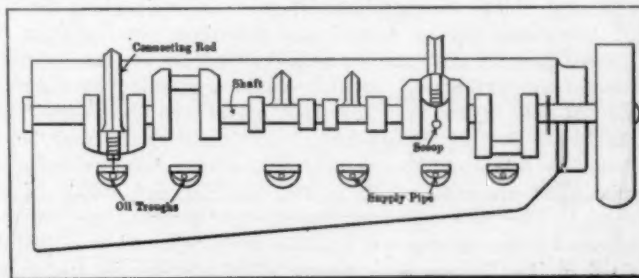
Sectional side view of the Premier six-cylinder crankcase, showing oil scoops and the troughs under them
